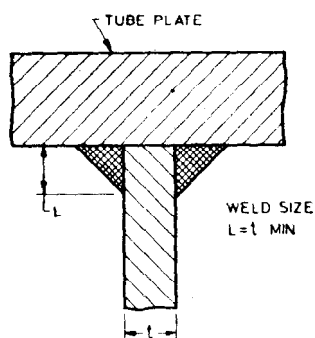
TUBE-TO-TUBE PLATE CONNECTIONS
